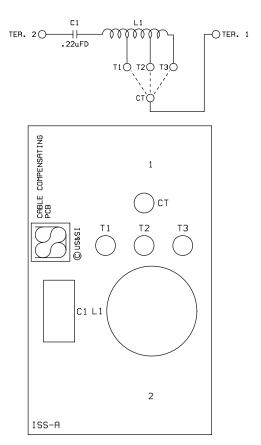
Cable Compensating PCB Parts Layout and Schematic Diagram
